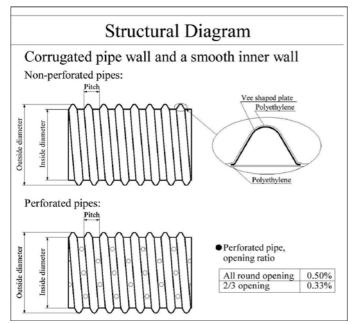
Double - Wall Steel Reinforced Corrugated Polyethylene Pipe
